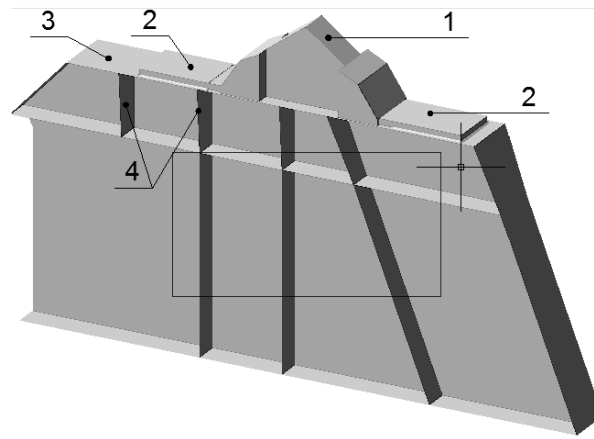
A supporting joint of the guide pulley (1 – a supporting bearing of the guide pulley; 2 – the front and back stops; 3 – the bearing surface area; 4 – the webbing of the supporting joint of the guide pulley)
